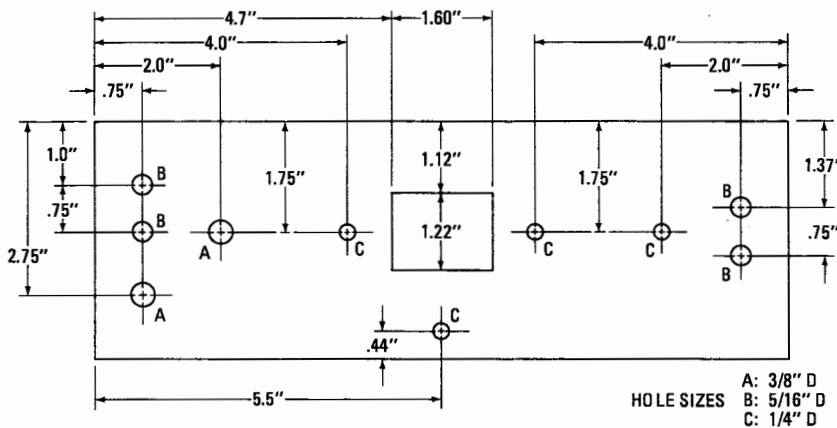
DRILLING GUIDE for the front panel. We advise protecting the panel's face with masking tape until all holes have been drilled.
